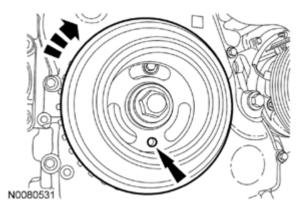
Positioning Crankshaft Pulley Hole At 6 O'Clock Position Courtesy of FORD MOTOR CO.
